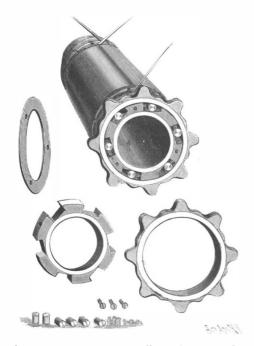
THE MORROW HUB AND DETAILS OF SPROCKET CLUTCH.
